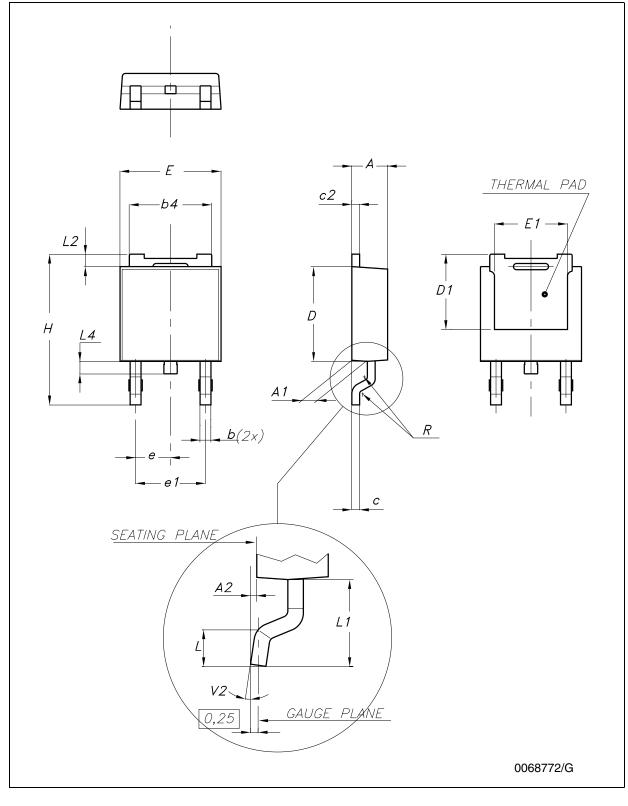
Drawing dimension DPAK (type IDS-subcon.)
